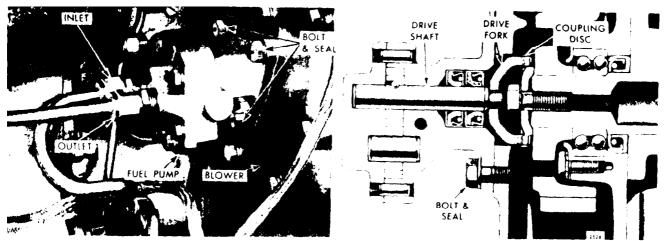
C-50. Typical Fuel Pump Mounting and Drive
